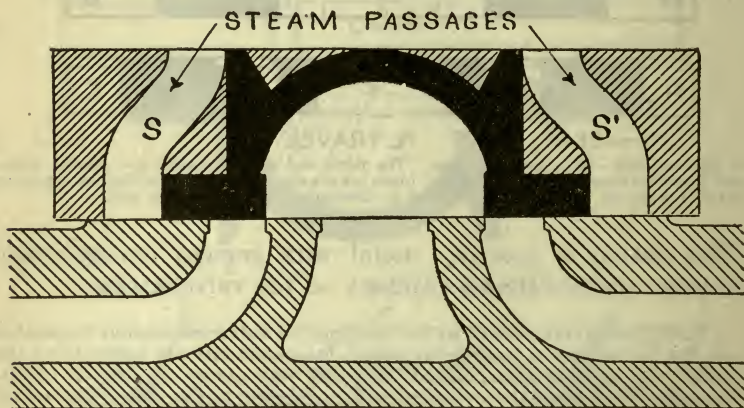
Showing similarity between the main valve of a riding cut off gear, and the ordinary slide valve. The main valve is simply a plain D valve, having steam passages S, S' at its ends, and planed on its back to form a seat for the cut off valve.
